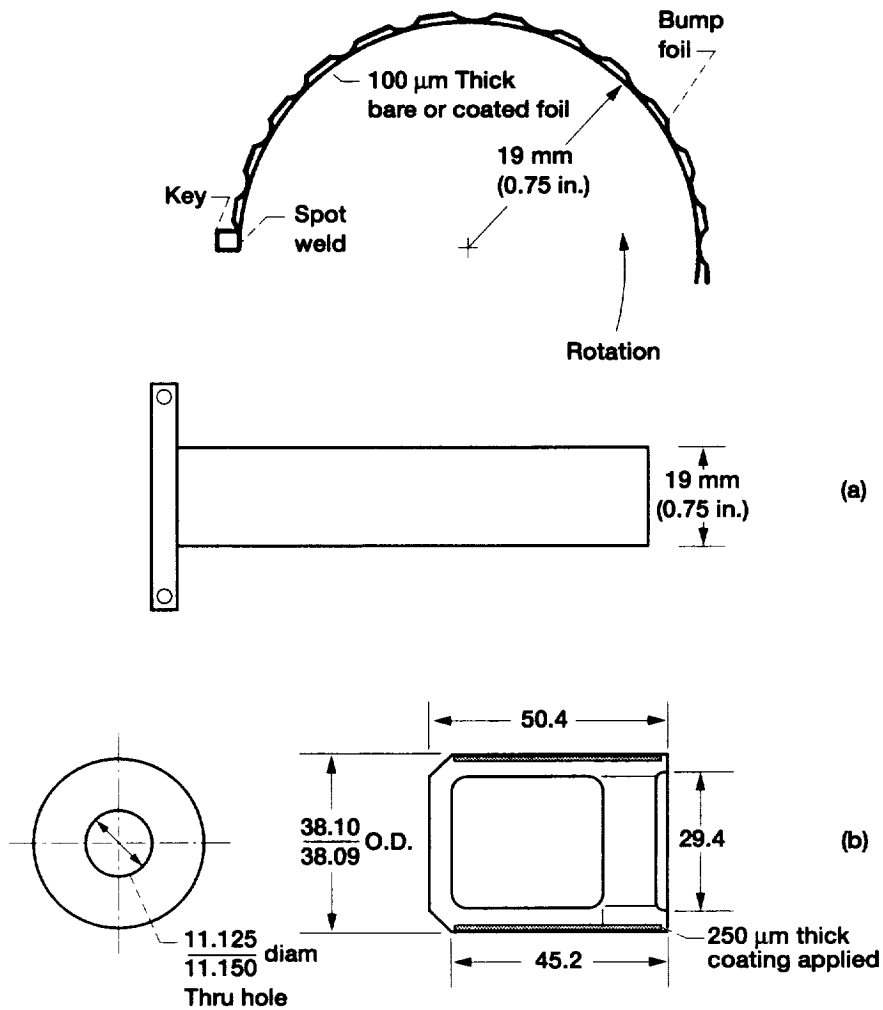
Specimen geometry. (a) Foil. (b) Journal. Units in mm.
